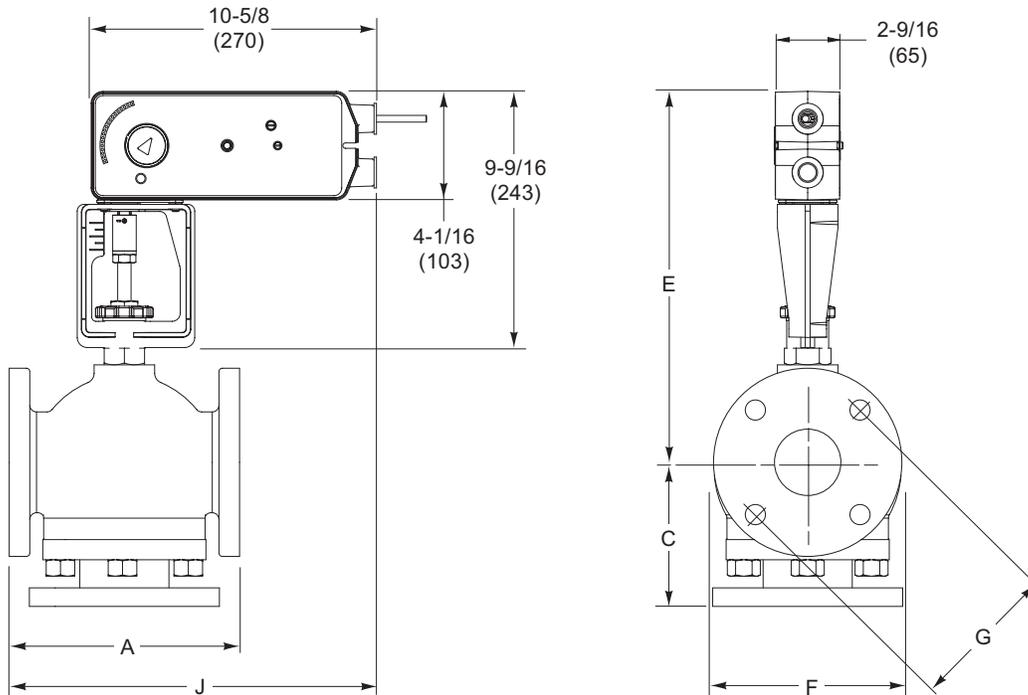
Mx61-720x with 2-1/2" to 4" 3-Way Flanged Globe Valve.
